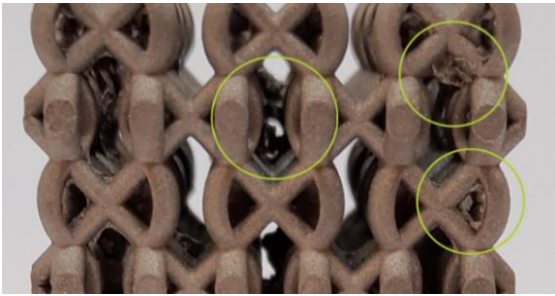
Variation 3 sample made in a slightly cracked mold with casting defects (flashes).
